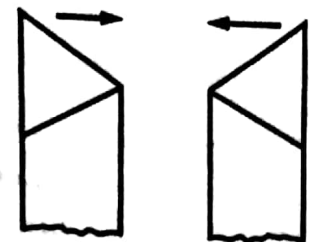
Left Hand and Right Hand Chamfering Tools
